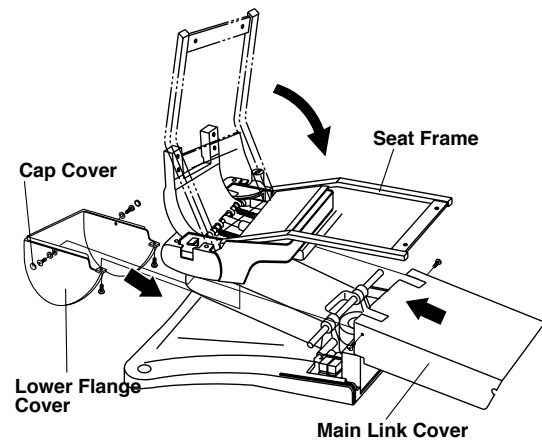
Fixing Main Link Cover and Lower Flange Cover
